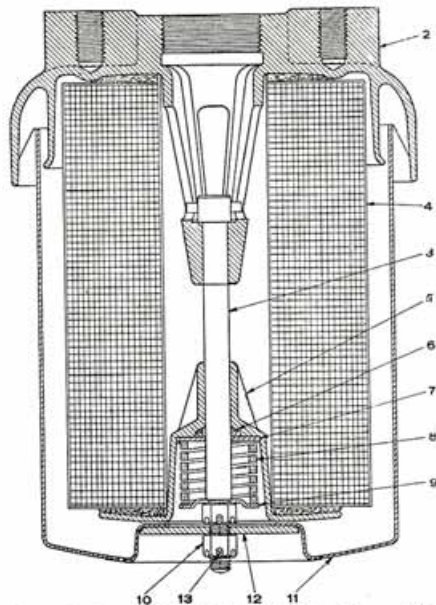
Sectional Assembly View of the Type "G" Air Filter
